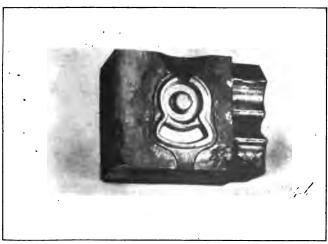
An Example of Drop Forging Die Showing Breakingdown Die at the Right
